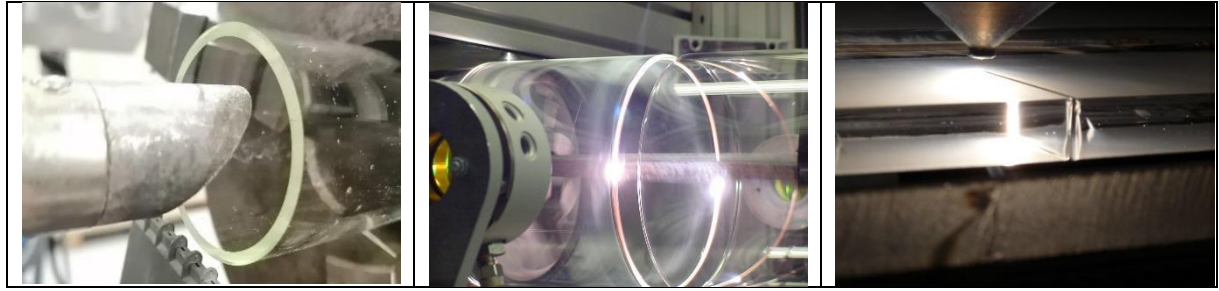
Blow up B33 ($\varnothing 36$ mm), hot softening separation B33 ($\varnothing 150$ mm) and cutting of fused silica ($d=6$ mm)
